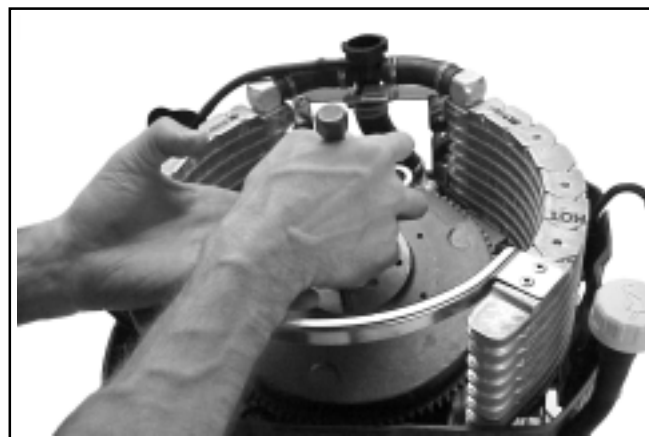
Removing Flywheel, Using Puller as a Handle.
